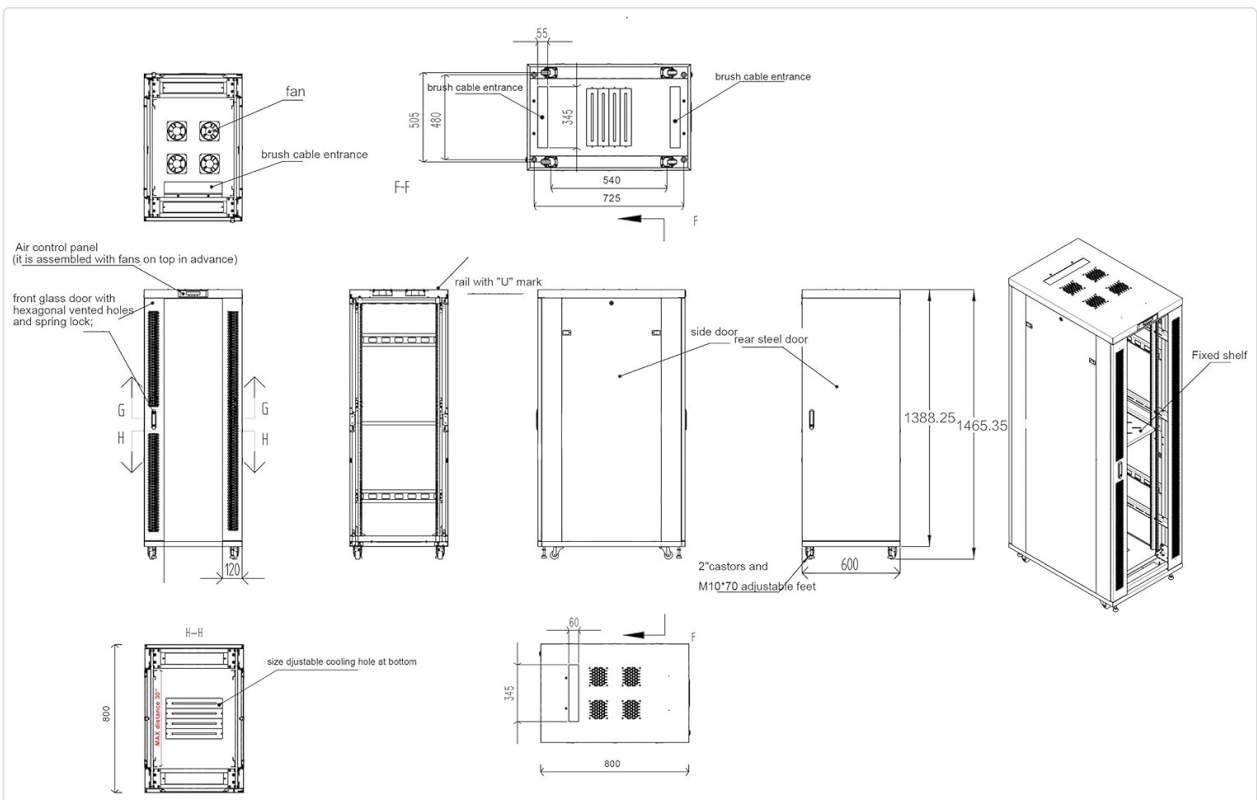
Technical drawing illustrating the cabinet's dimensions and key components, including fan placement, cable entries, and door types.
